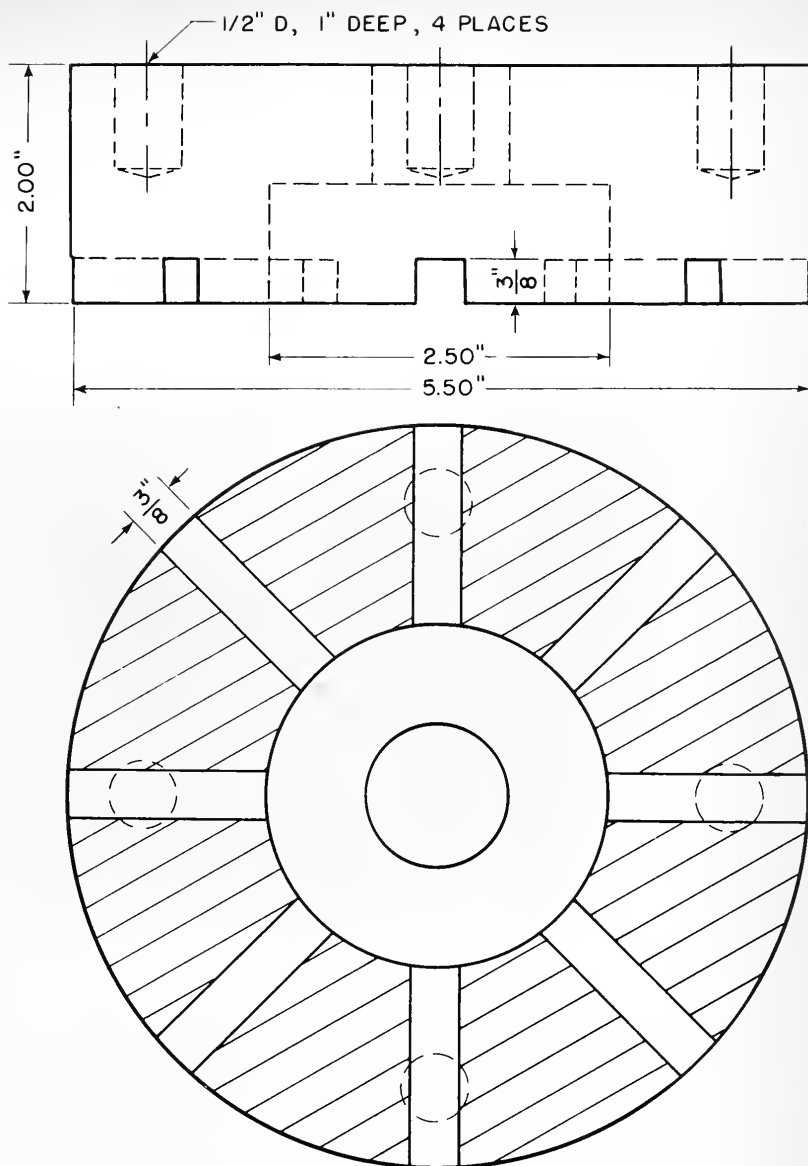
TESTING SHOE FOR SKID-TEST APPARATUS
